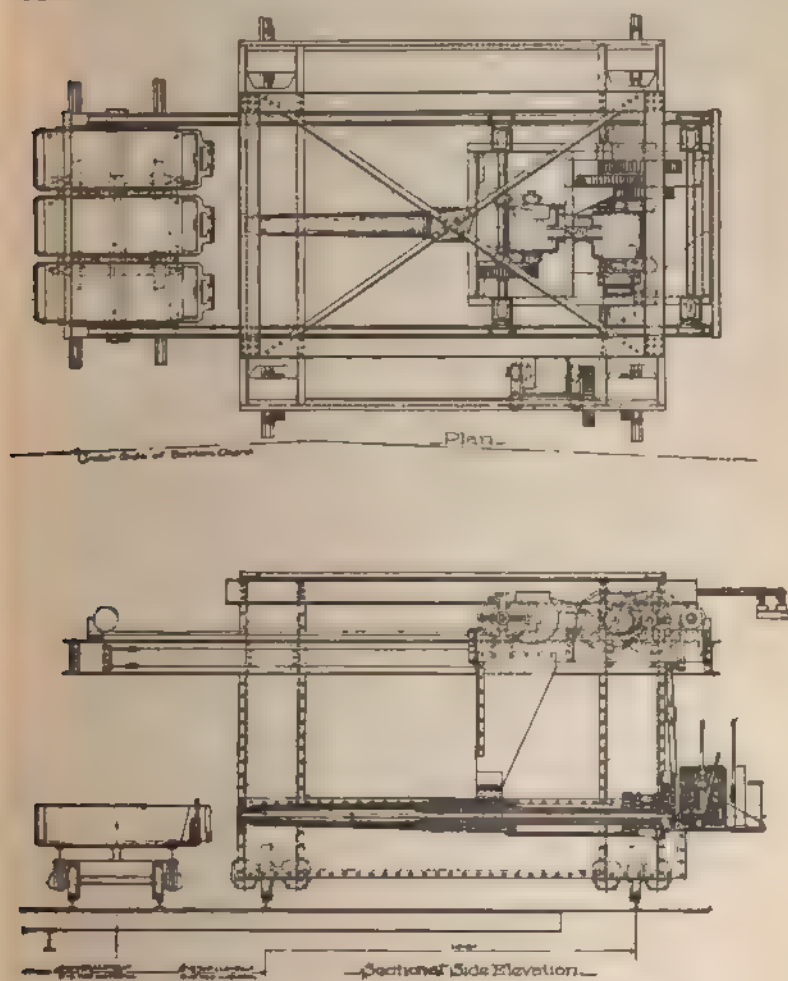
FIG. VIII-G. WELLMAN CHARGING MACHINE.
